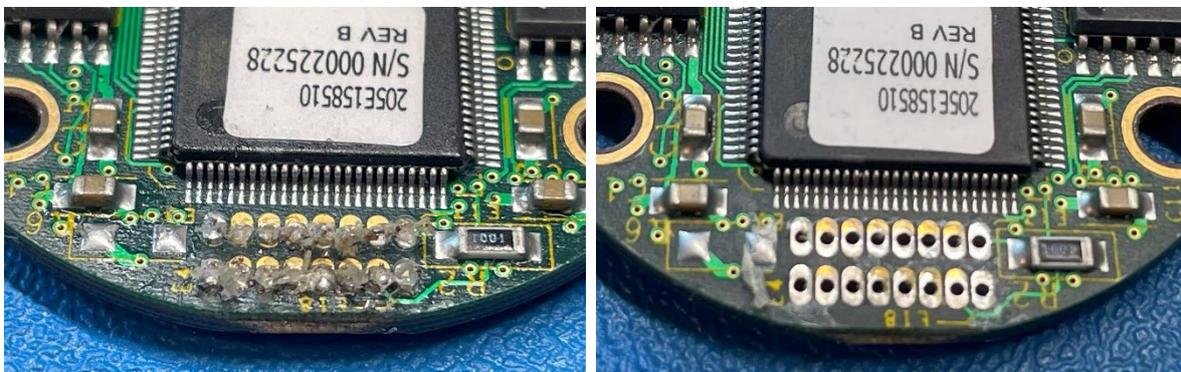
Removal of the remaining cable assembly. (Left): Before. (Right): After.
